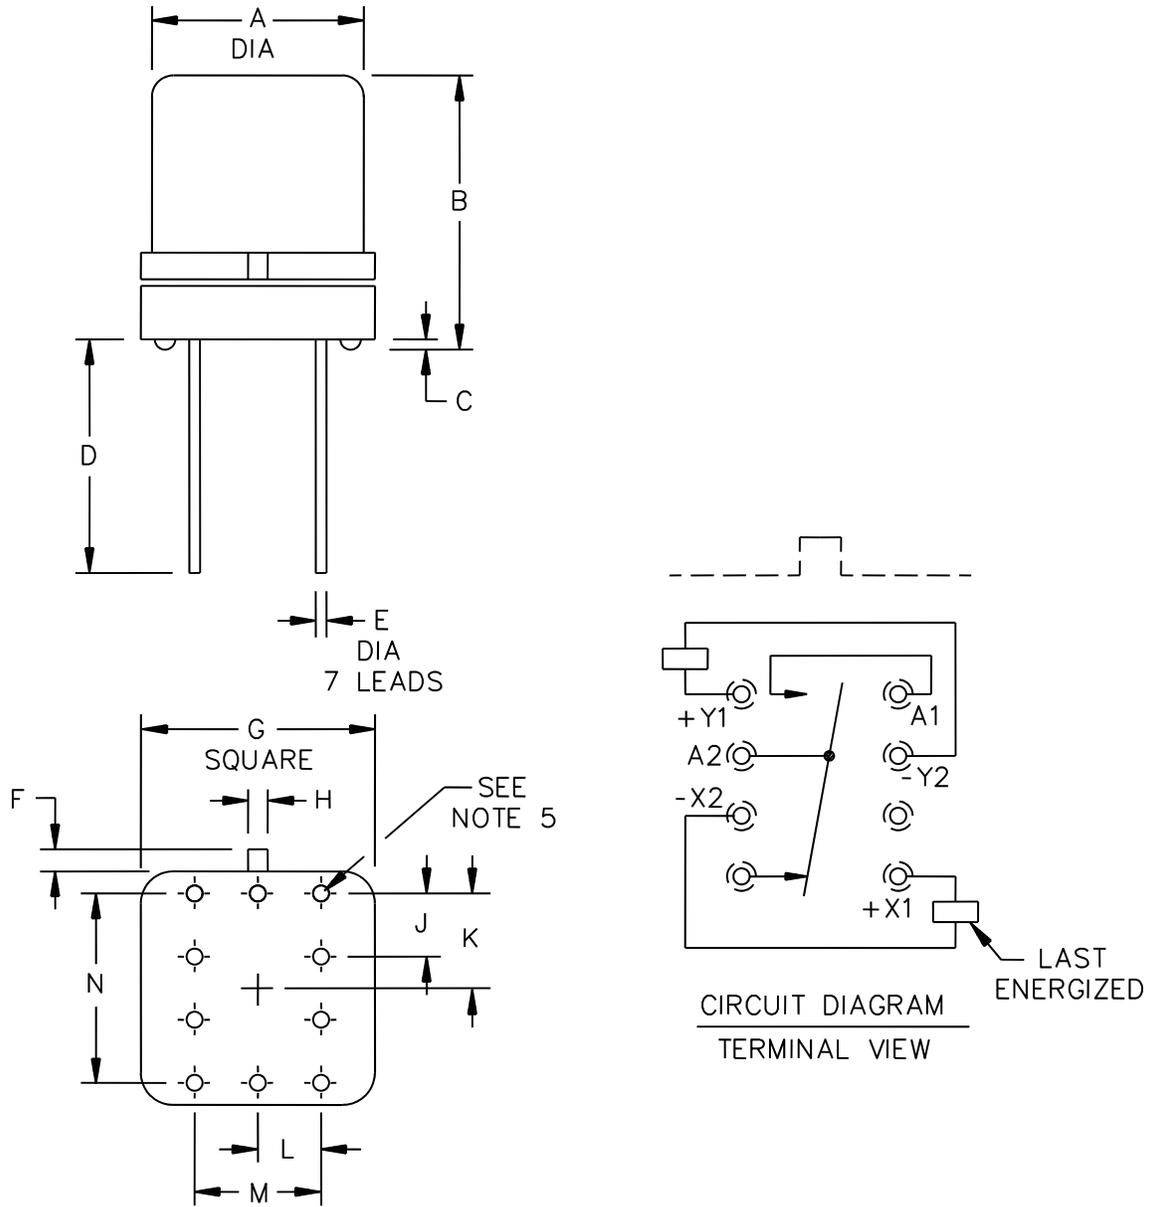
Dimensions and configuration relay with spreader mounting pad attached.
